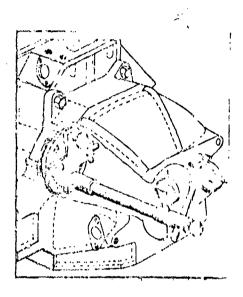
Checking coaxiality and perpendicularity of a clutch housing installed on the cylinder block
